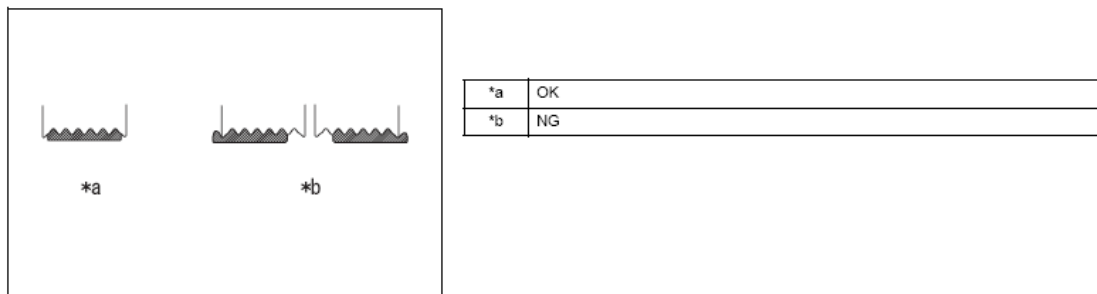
Identifying Proper And Improper Setting Of Fan And Generator V-Belt Pulley
